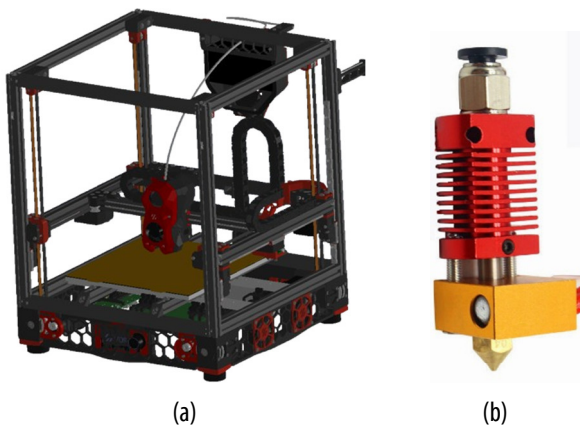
Moving mechanism (a) and printhead assembly (b)
